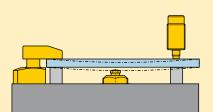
Simple hydraulic fixture with minimal workpiece deflection.
